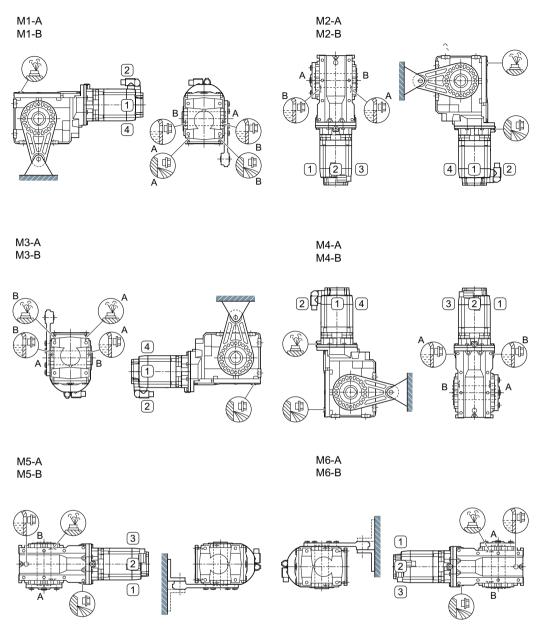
Mounting positions for servo bevel geared motors BAD, shaft-mounted design, frame sizes 39 - 49, 2 stage
